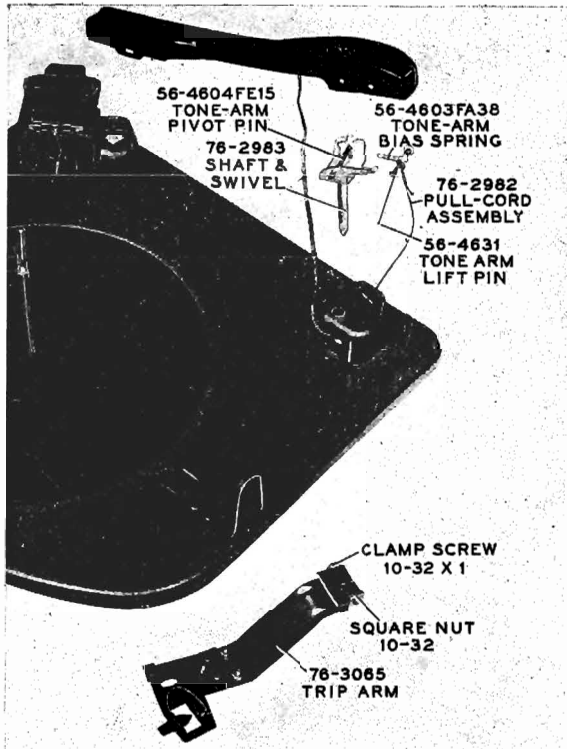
TONE ARM AND TRIP ARM, REMOVED TP-4132
